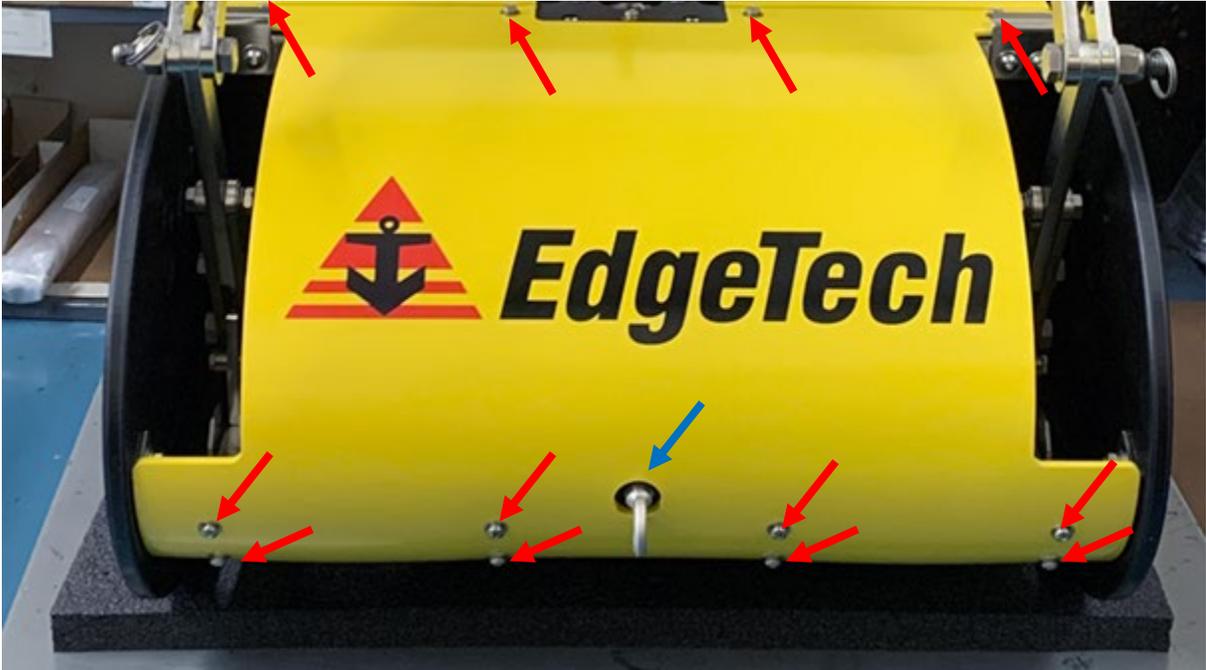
3400 Pole Mount Instruction-Front Panel Removal With (12) Screws and Eye Bolt Called Out
